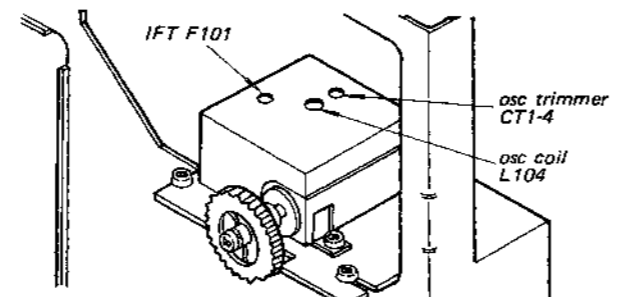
Fm tuner block adjustments on fm tuner block
